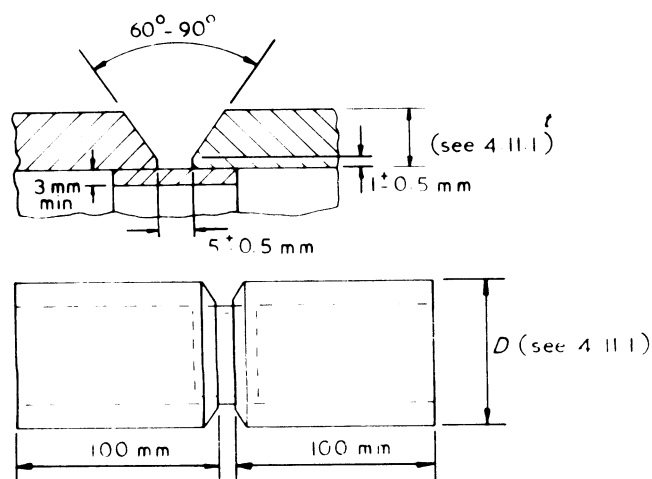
Test piece for butt weld in pipe (with permanent backing)
